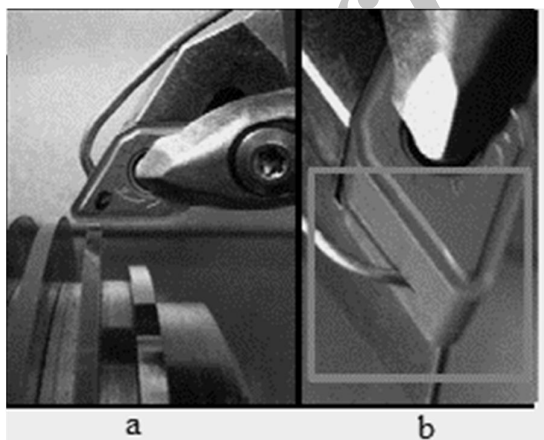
Experimental test equipment; (a) the orthogonal machining test, (b) embedded thermocouple for measuring the temperature
